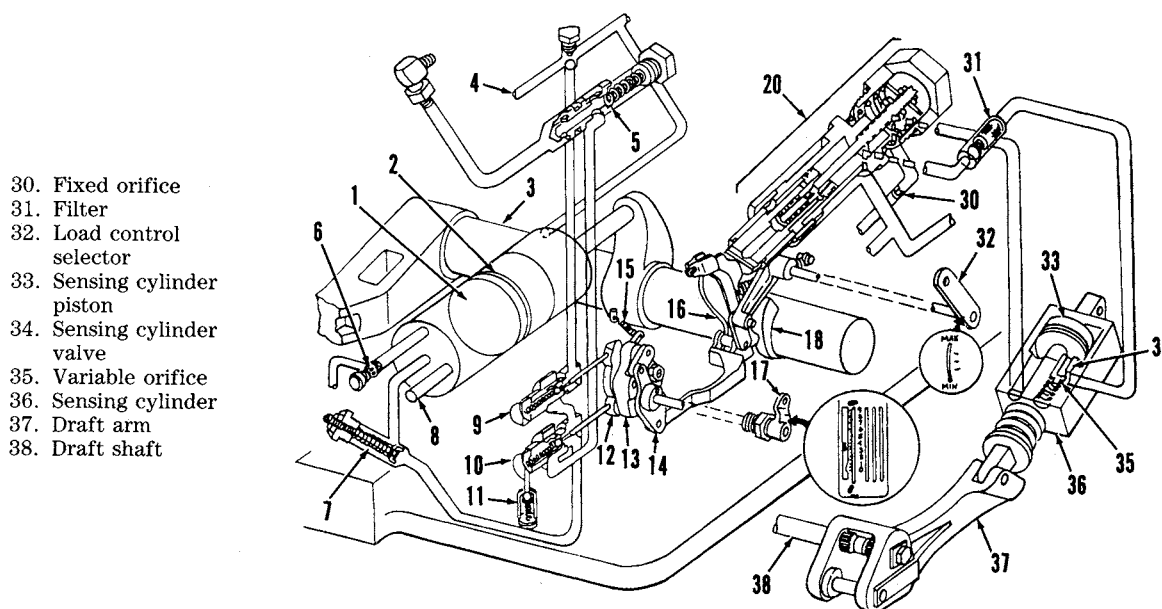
A—Schematic view of rockshaft assembly used on Models 4650 and 4850. A hydraulic load sensing system is used on these models. Refer to Fig. 240 legend except for the following:
